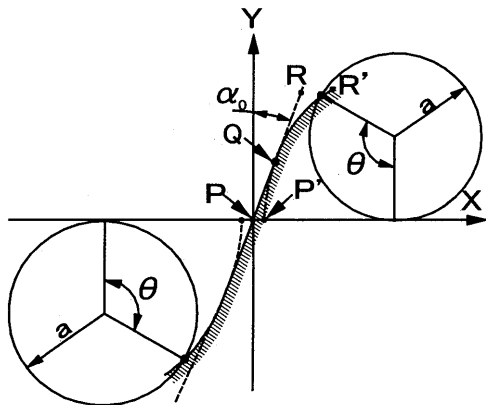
Basic rack form of involute-cycloid composite tooth profile helical gear
